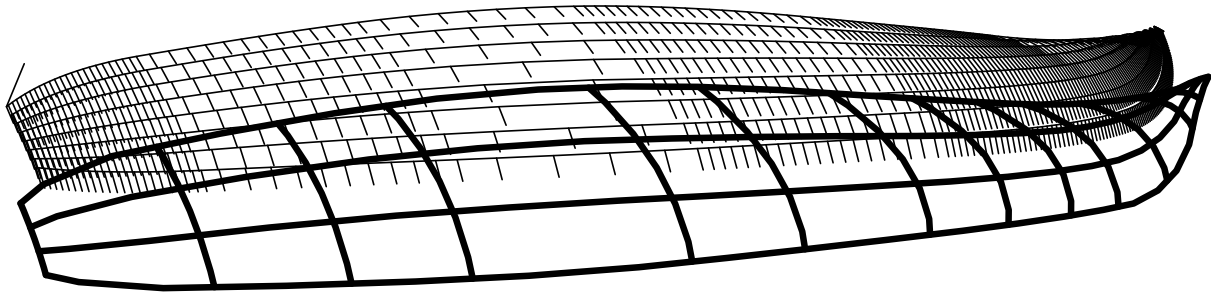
The toolpath for the top surface of the blade of the propeller in Figure 4. See Plate 1 for a picture of the machined propeller. Shown is a zigzag toolpath for which the tool is retracted after all ruled surface paths are being executed.
